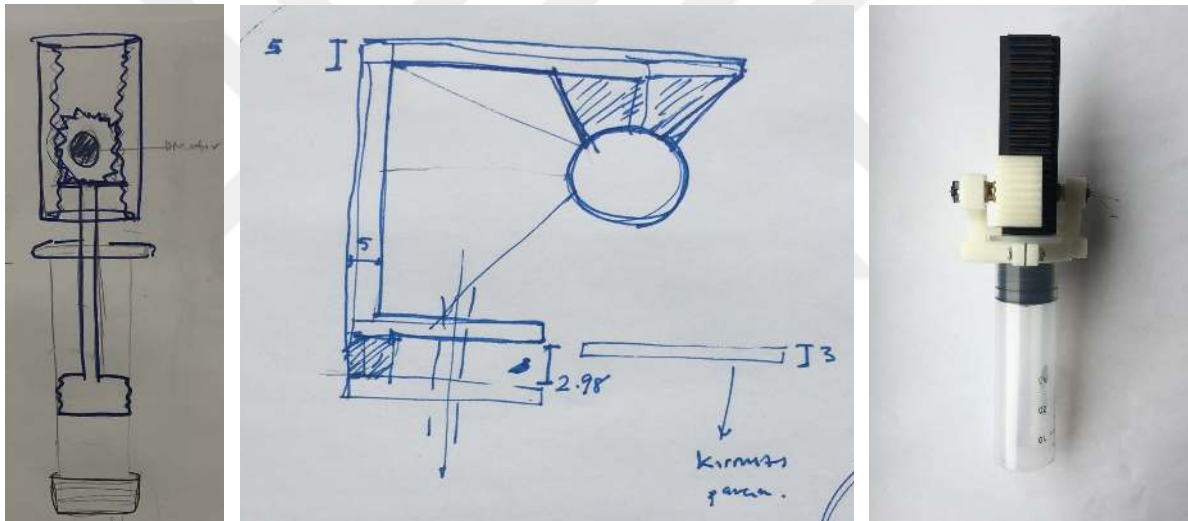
(left) sketches for the rack and pinion gears, (right) 3D printed
